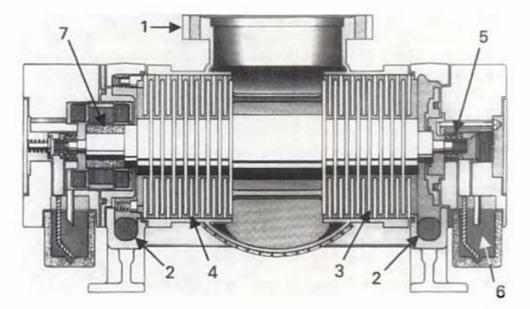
Section view of Pfeiffer TPU-200 turbomolecular pump: (1) inlet, (2) outlet, (3) rotor disk, (4) stator disk, (5) bearing, (6) oil reservoir, (7) motor. Reprinted with permission from A. Pfeiffer Vakuumtechnik, GmbH, Wetzlar, Germany.
